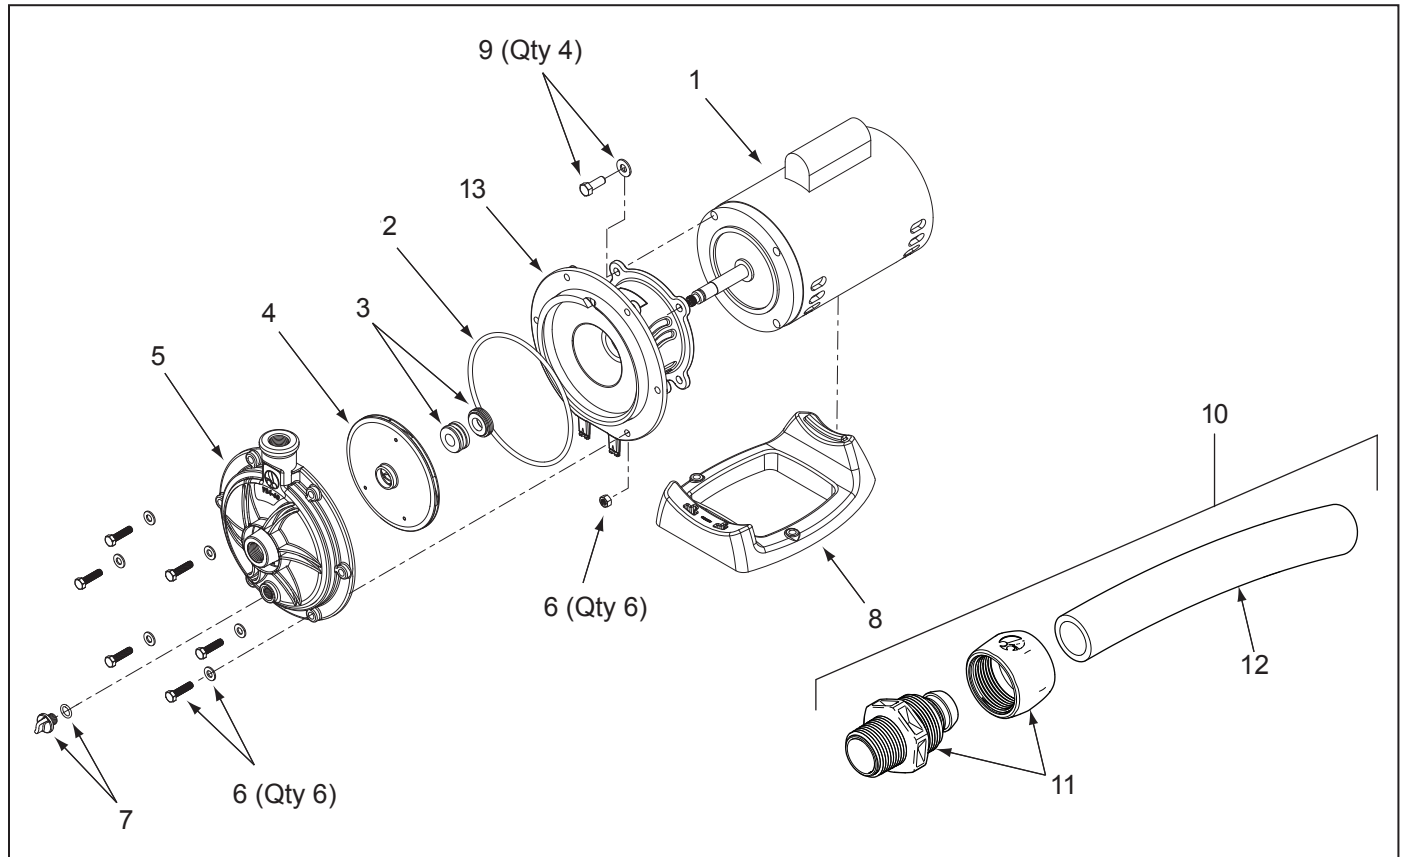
Polaris PB4-60 Booster Pump Exploded View
